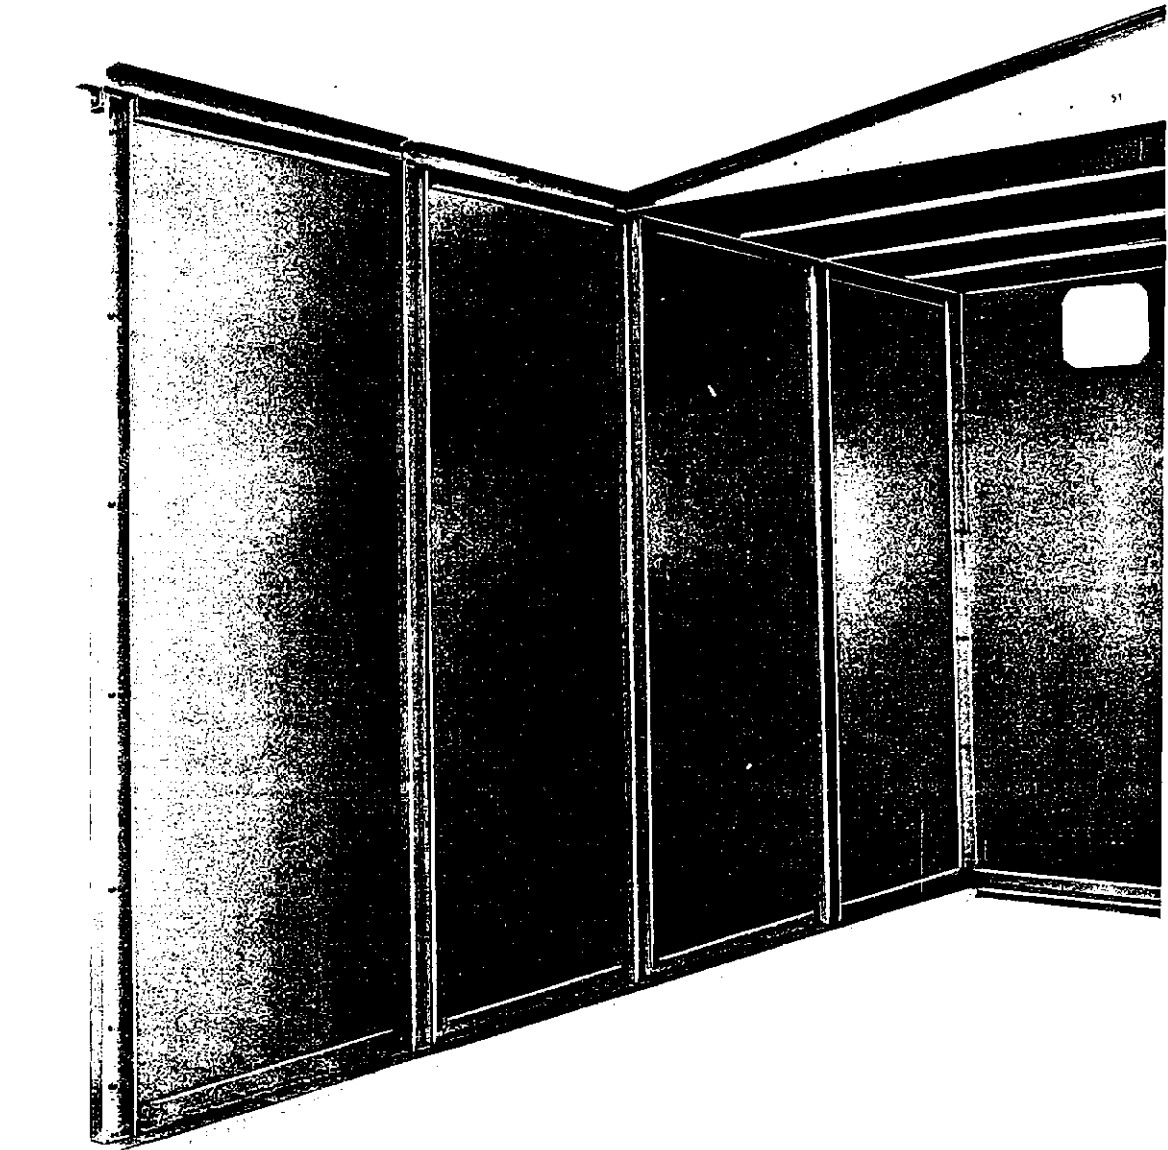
Enclosure, Partial Assembly, Rear Wall Detail
